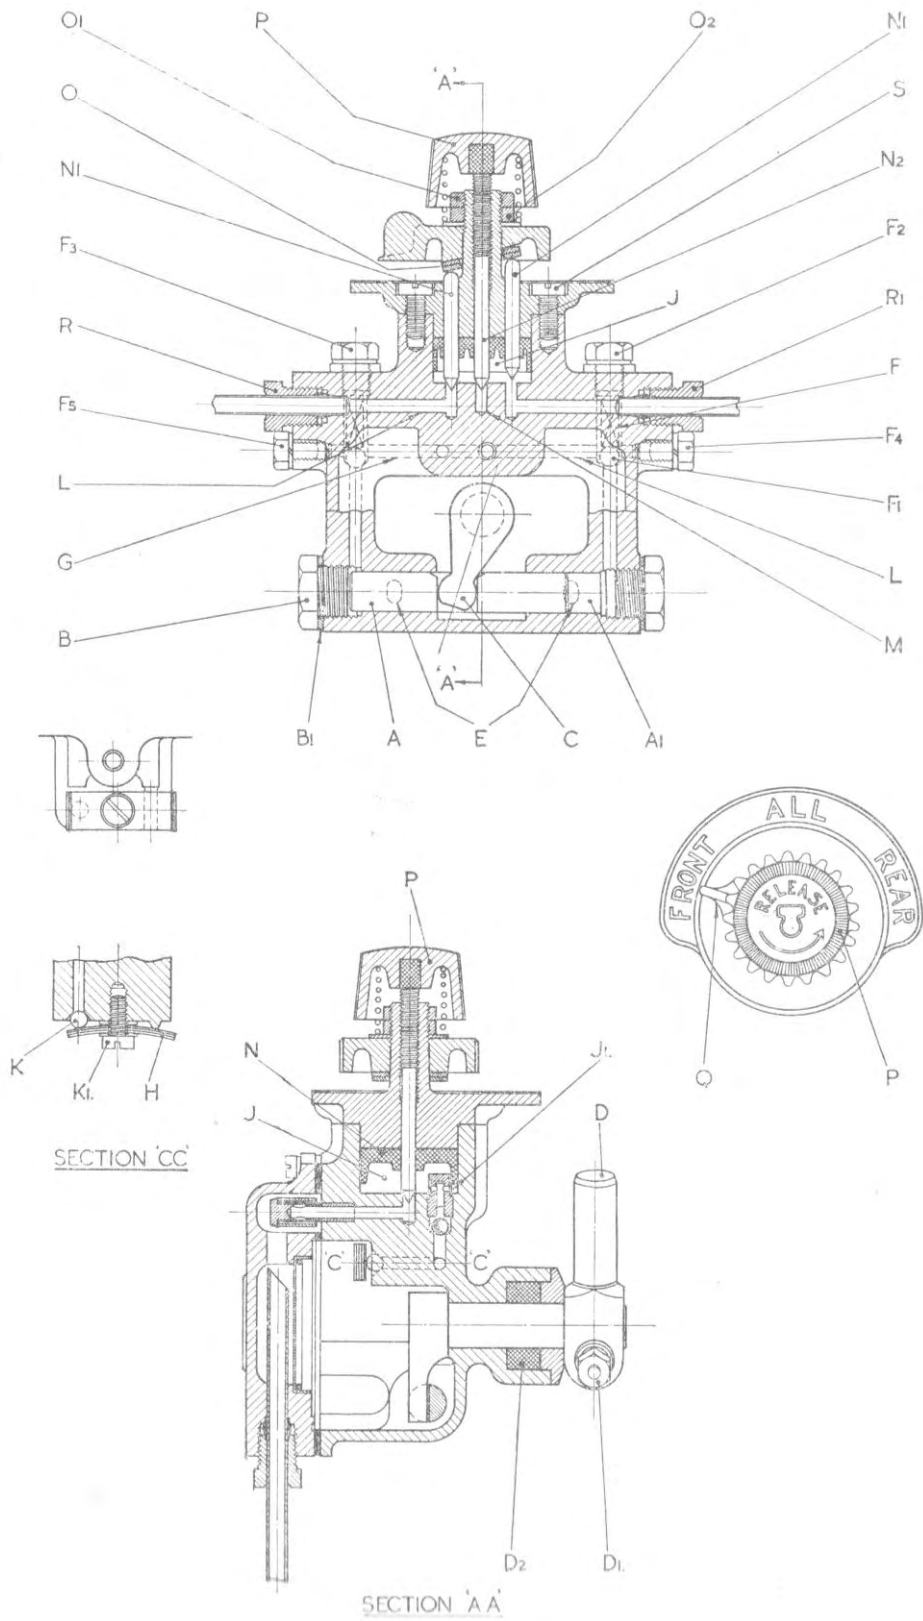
DISTRIBUTOR AND PUMP UNIT
